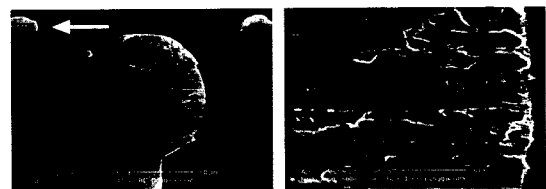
Fractured surface of a sheared solder bump before aging(100 μm pad)
